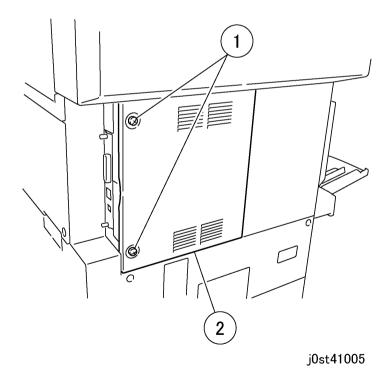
Removing the ESS Cover Assembly (j0st41005)
